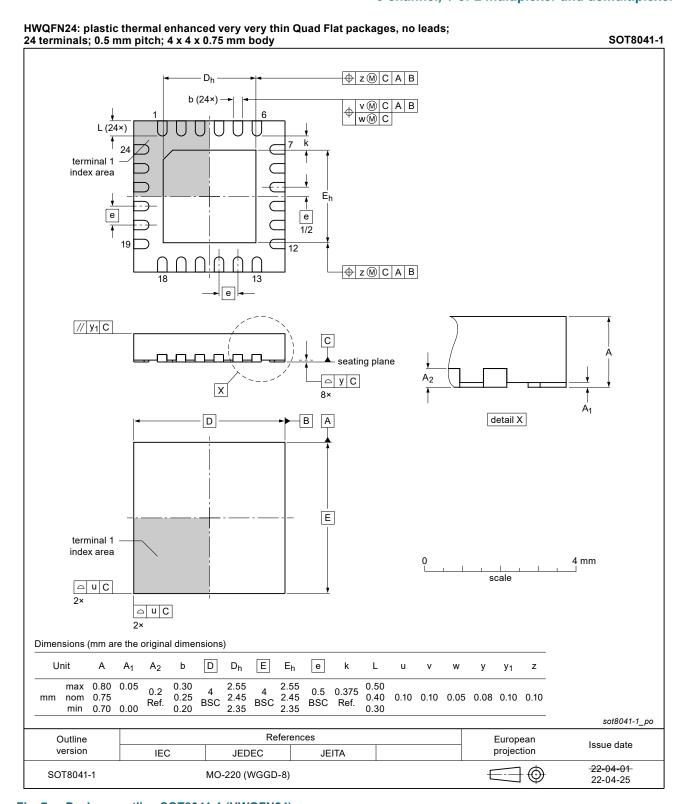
Package outline SOT8041-1 (HWQFN24)
